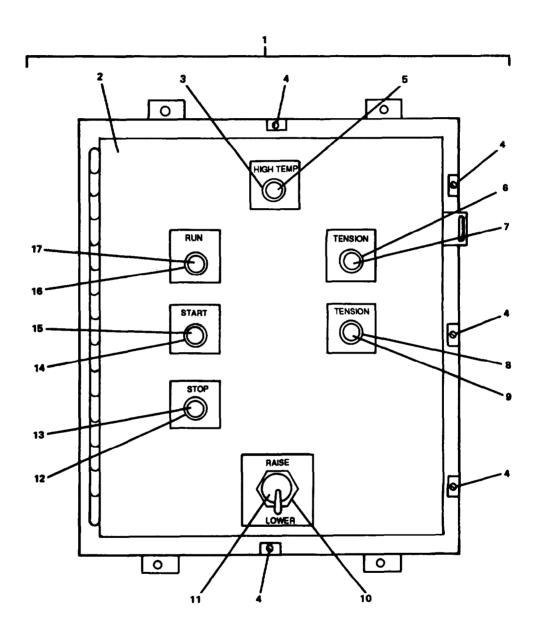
Control Panel (Winch Room) Disassembly (Sheet 1 of 2).
